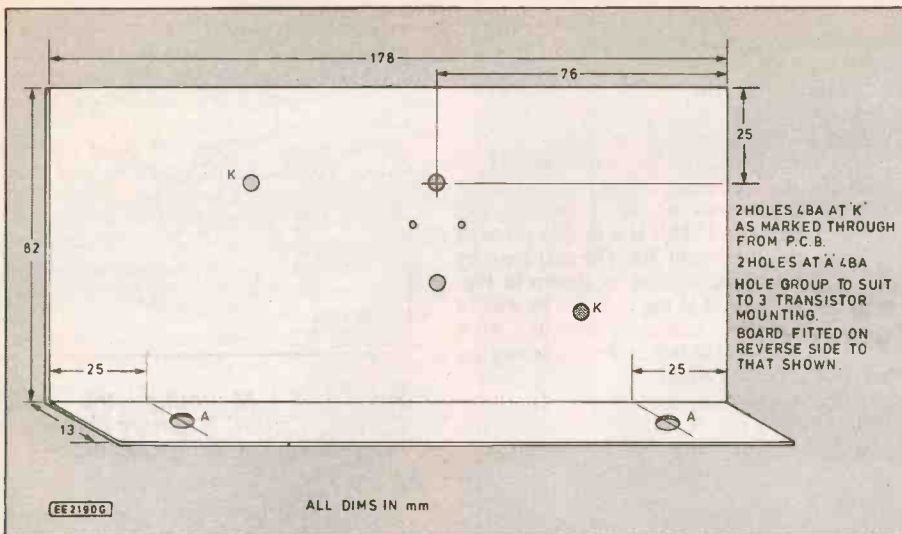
Drilling details and dimensions of the main aluminium heatsink.
